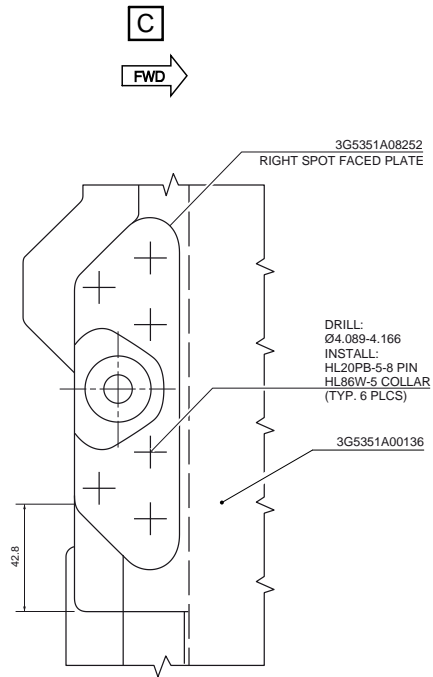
(Sheet 3 of 6) Tail plane lower fitting - Replacement (remove and install a new item)
